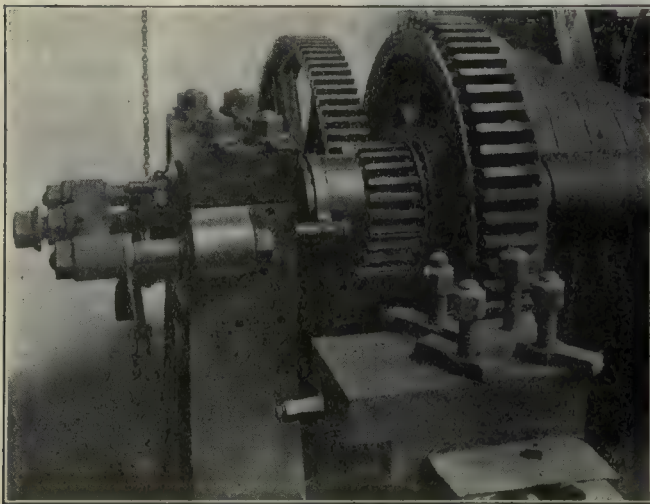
SPINDLE THRUST ON OLD PIT LATHE
